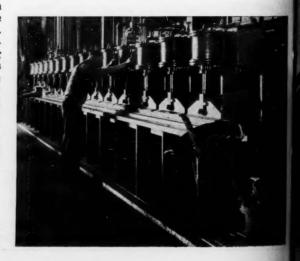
Air-operated press for baking and pressing the stator coils. The press is of welded steel plate.
